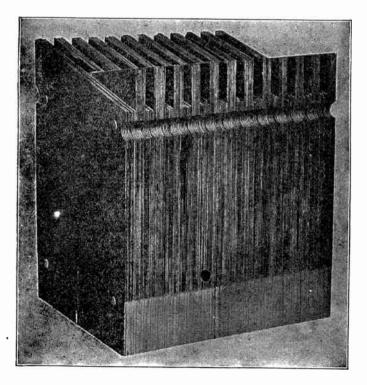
Fort Wayne laminated core without pole piece, as used on large dynamos. It is constructed of punchings from sheet iren, and riveted under pressure. The alternate end projections and grooved base insure good mechanical union of metal in cast welding to magnet frame. Reluctance between core and yoke is reduced to a minimum by cast welding. The core is slotted parallel with the shaft to prevent, as far as possible, the distortion of the magnetic field, especially on heavy overloads,
